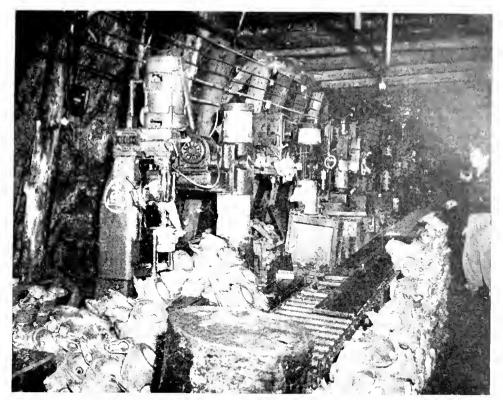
Asakawa plant cylinder heads awaiting machining. Note roller conveyor.
